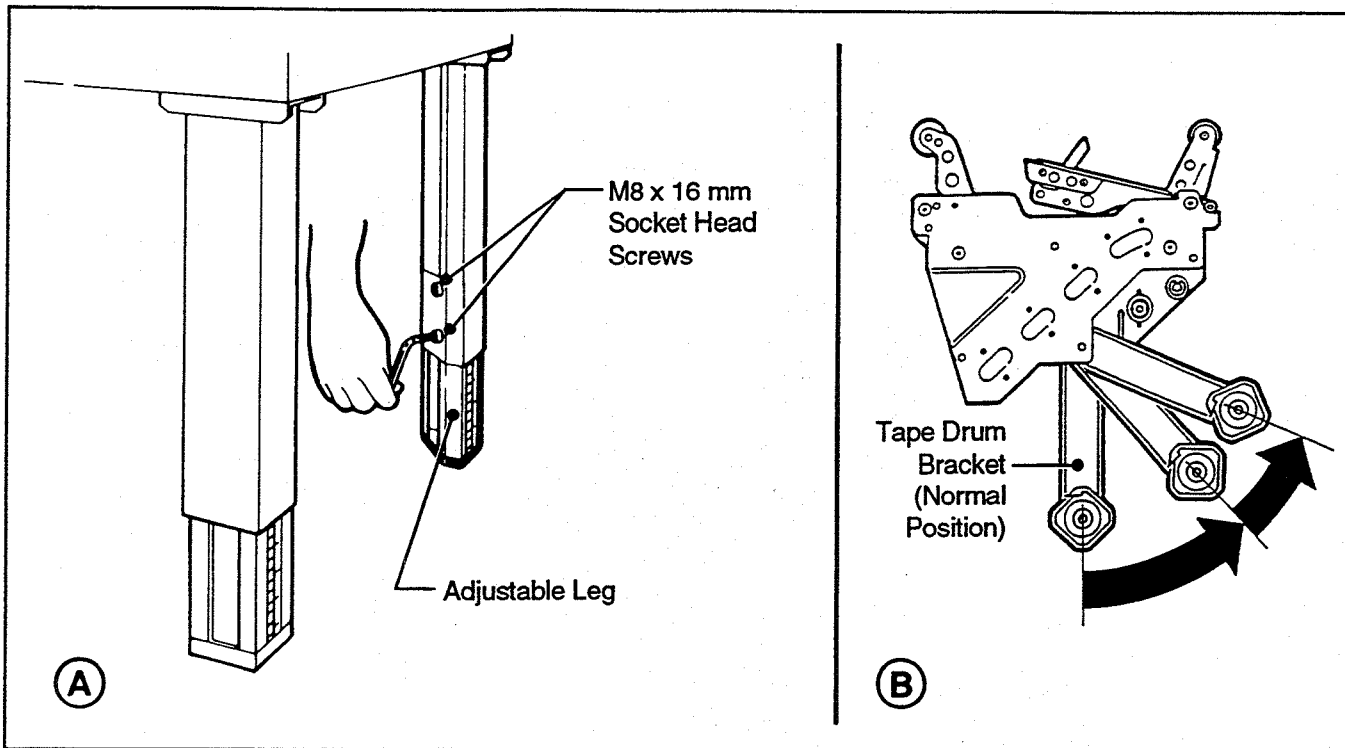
Conveyor Bed Height/Tape Drum Bracket
